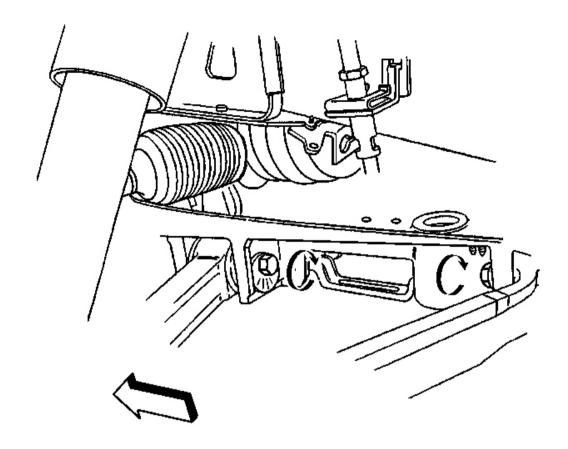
Front Caster And Camber Courtesy of GENERAL MOTORS CORP.
